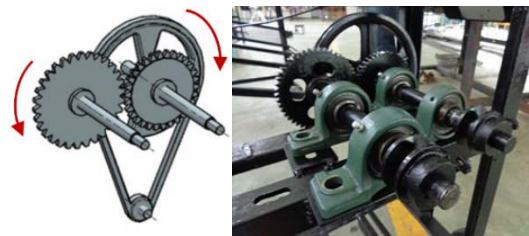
Drawing and assembly of the reverse mechanism for expanding roller.
